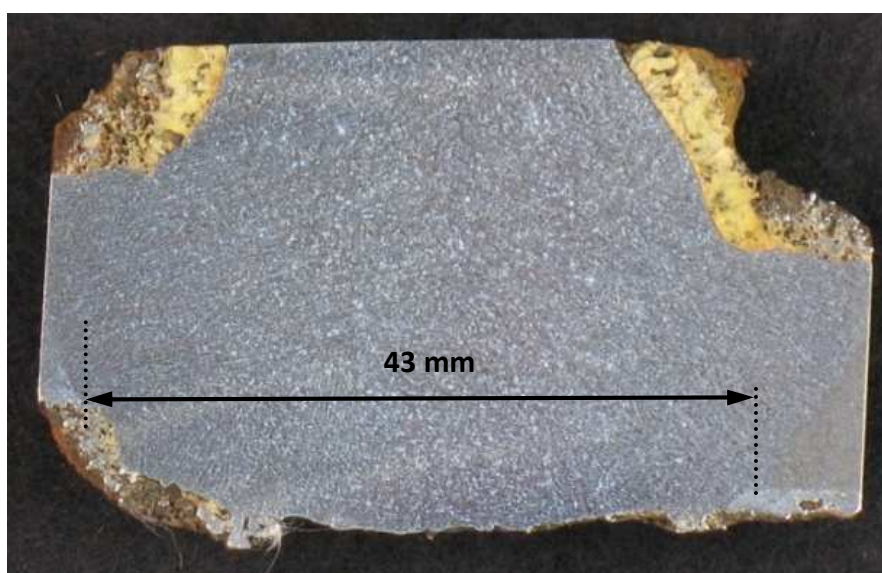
Longitudinal vertical section of one foot tip – S3
